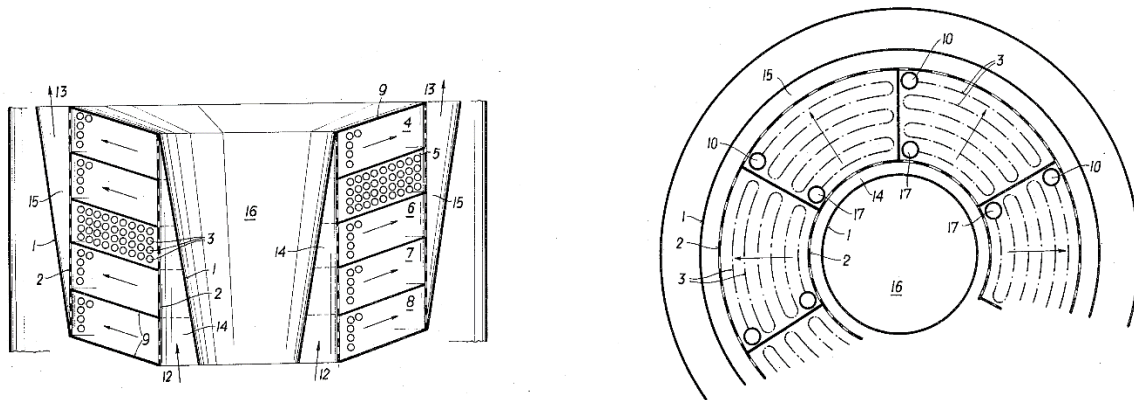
Plan (Left) and Elevation (Right) Views of Coiled Tube Heat Exchanger, from Gilli et al. patent [19]
